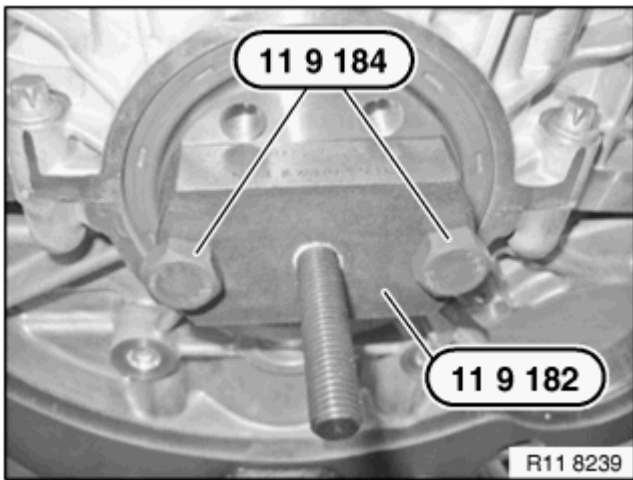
Fastening Special Tool 11 9 182 With Special Tool 11 9 184 On Crankshaft
